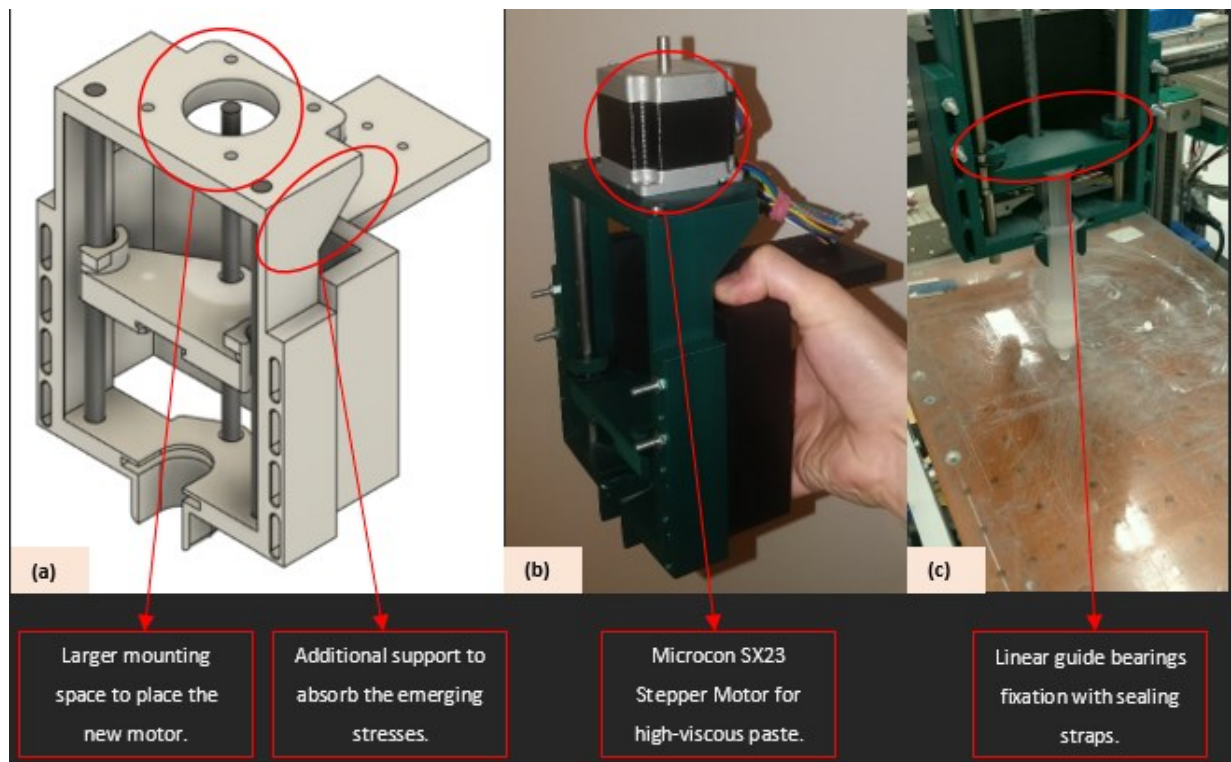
2nd Design Iteration: (a) The Full Assembly of the Extruder on Fusion360, (b) Full Assembly with Microcon SX23, (c) Linear Guide Bearings Fixation to the Plunging Driver
